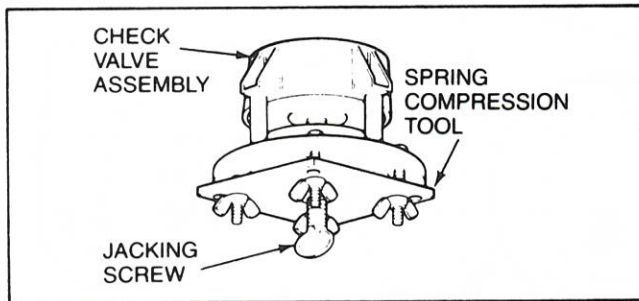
CLEANING 1 1/4", 1 1/2" AND 2" CHECK VALVE
